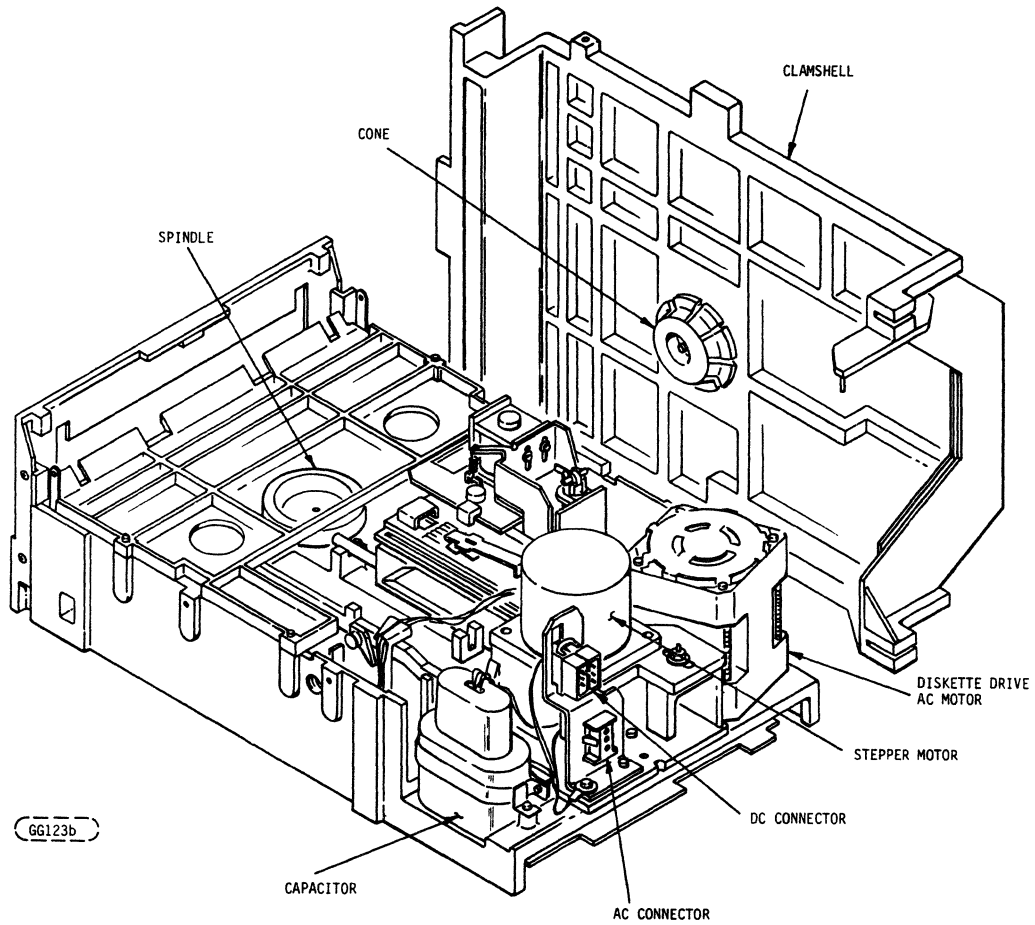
POSITIONING AND HEAD-LOAD MECHANISM, CLAMSHELL COVER RAISED.
